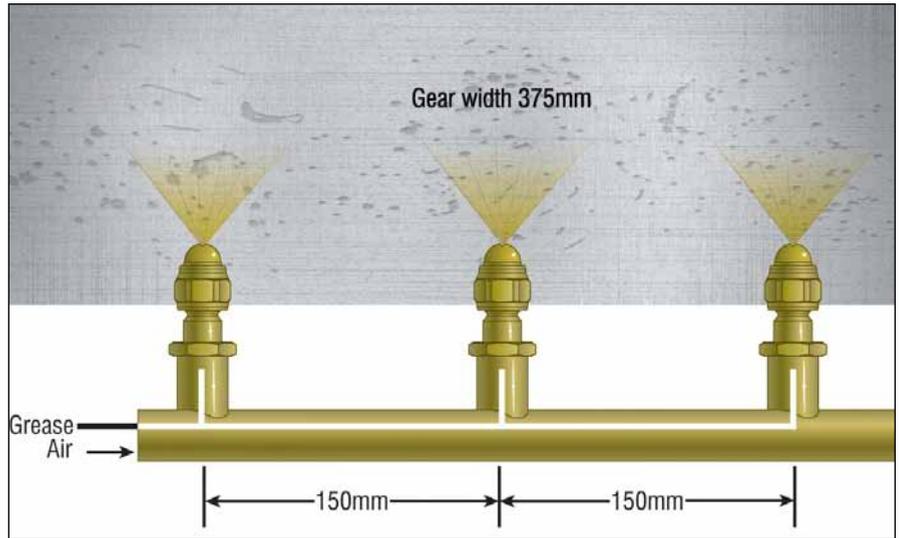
Placement of spray nozzles; example of three-nozzle spray bar with spray nozzle spaced apart at 150 mm.
